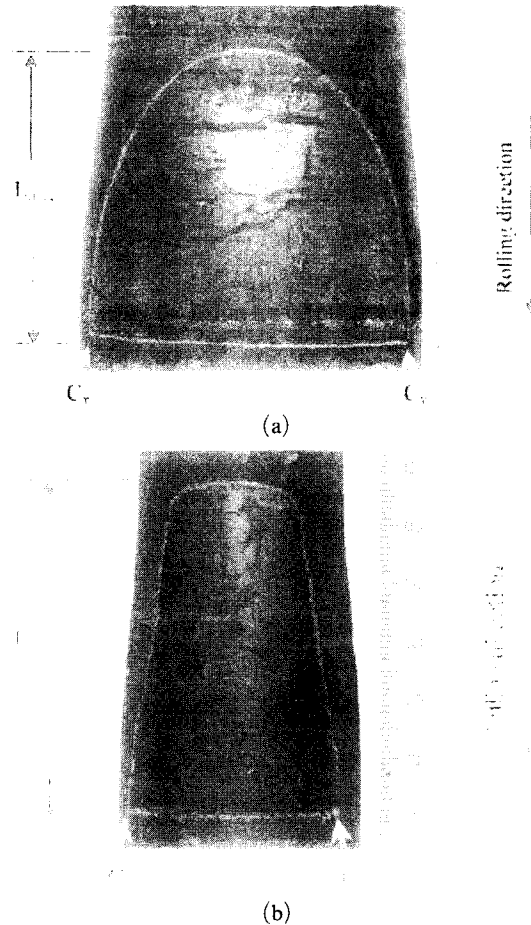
Shape of projected contact area of workpiece deformed inside of roll groove and its geometric designation when a specimen with 60mm diameter is rolled. (a) Oval pass and (b) Round pass. C_x and C_y are coordinates where the roll groove and workpiece are separated each other at the roll gap position. The pass sequence is described in Fig. 4
